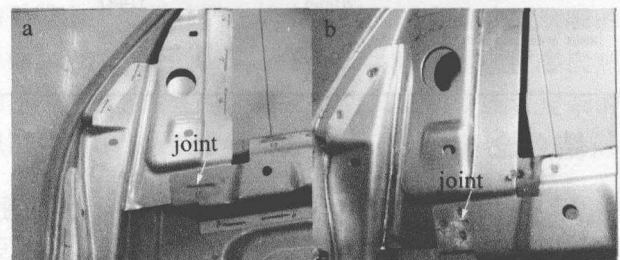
a—laser welding of door b—spot welding of door
